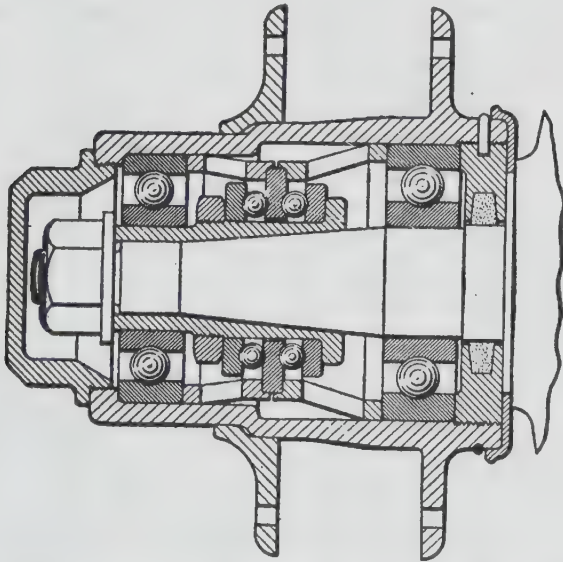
MOUNTING OF FRONT WHEEL RADIAL AND THRUST BALL BEARINGS
